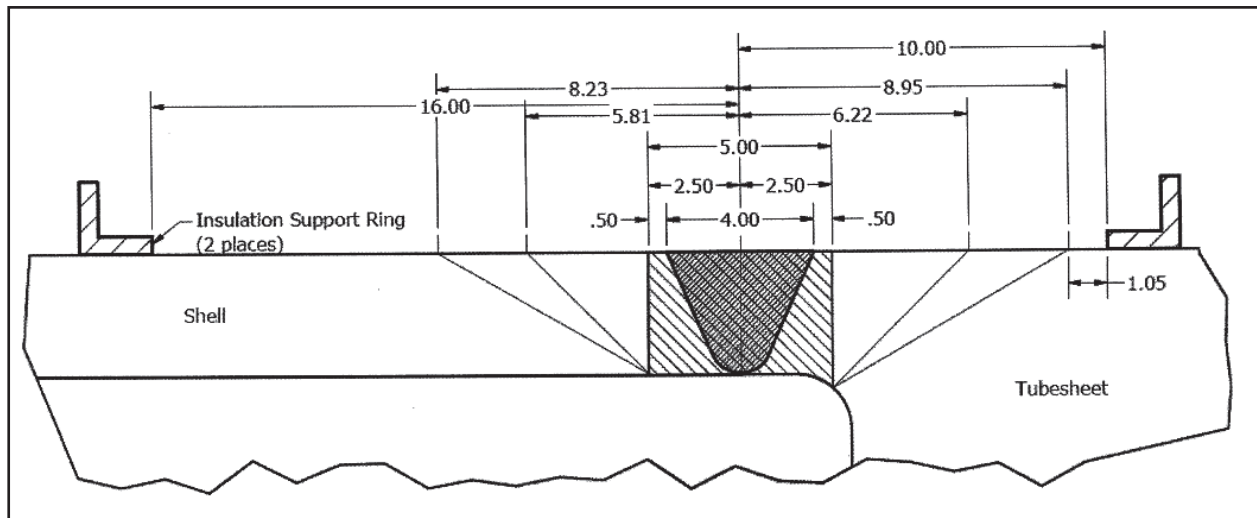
Weld SG-2-3-2, 45° & 60° Axial and Circ Scans
